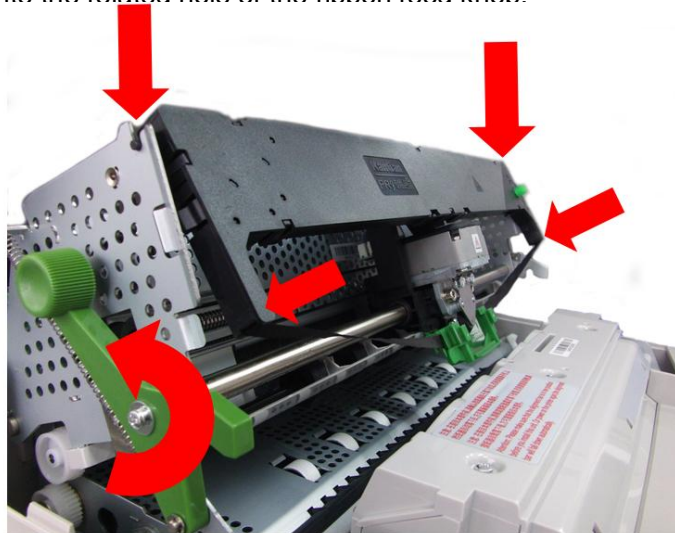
Lifting the Upper Mechanical Assembly
